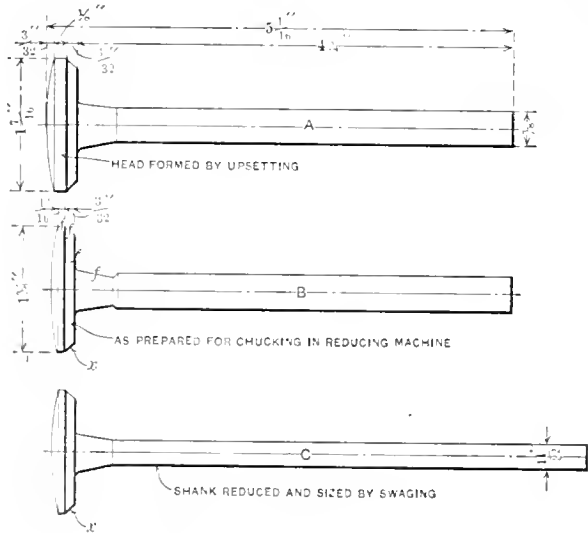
Three Stages in the Making of a Gas Engine Valve.
